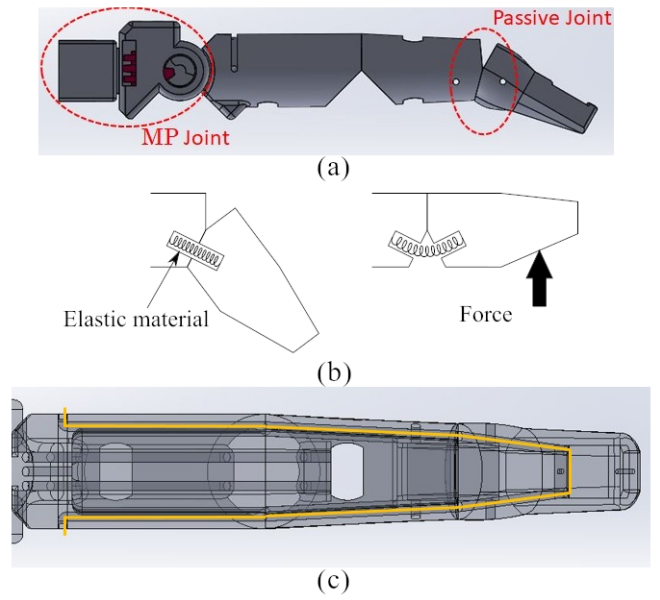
Design of the index finger. (a) Side view of the index finger. (b) Movement of a passive joint. (c) Wire connecting each part of the finger.
